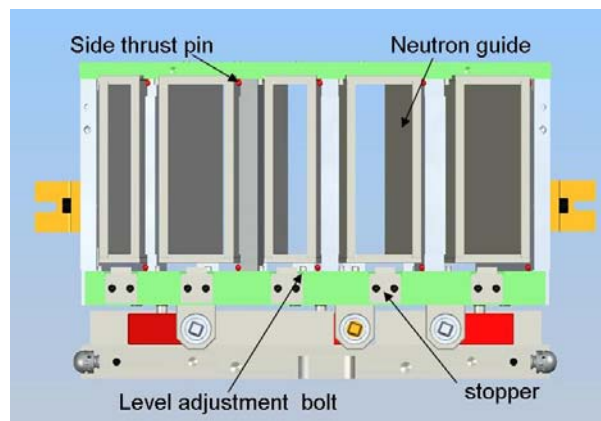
The section view of a guide cassette which contains neutron guides and adjustment parts for the alignment
